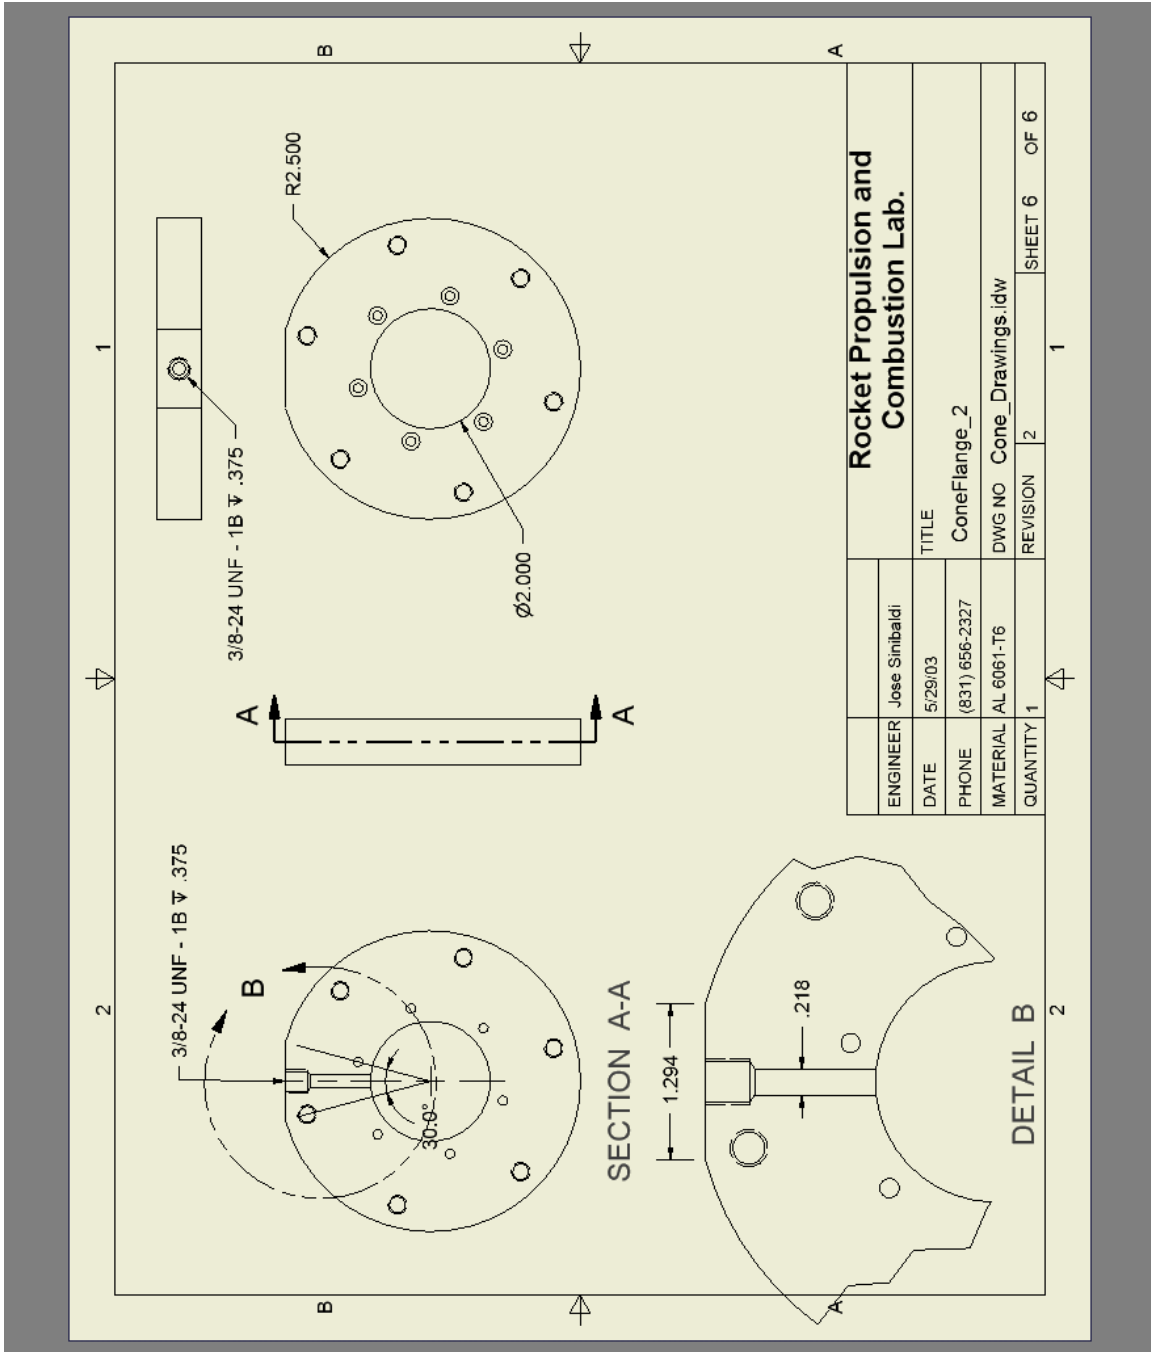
Cone Flange for Axisymmetric Test Section (Drawing 3 of 3)
